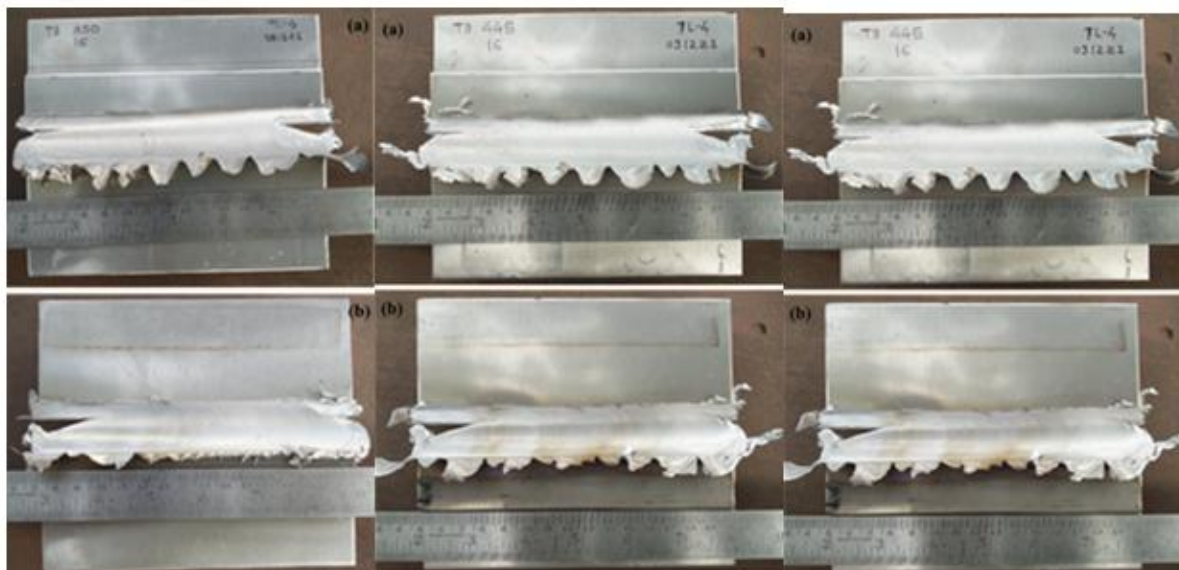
(left) Weld formation in experiment-12, (a) Top surface, (b) Bottom surface; (middle) Weld formation, in experiment-13, (a) Top surface, (b) Bottom surface; (right) Weld formation in experiment-14, (a) Top surface, (b) Bottom surface
